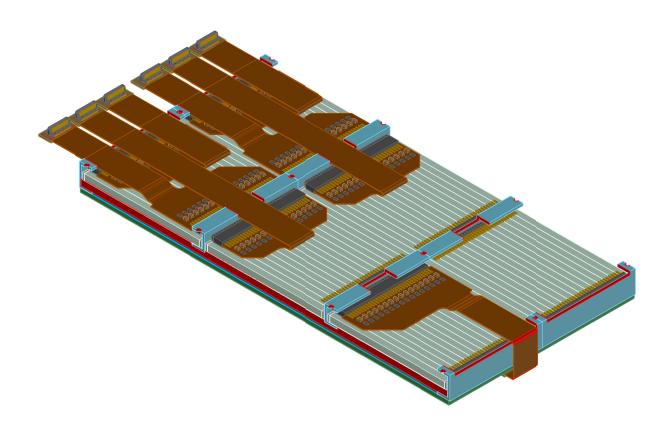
BTL tray section showing the layout of the sensor modules and a possible flex cable connection configuration.
